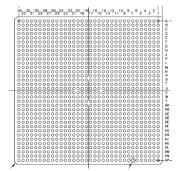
Bottom View of a XILINX FG1156 – Package Size is 35 x 35 mm with a 34 x 34 Array of Solder Balls of Nominal Diameter of 0.6 mm and a Pitch of 1.0mm[1].
